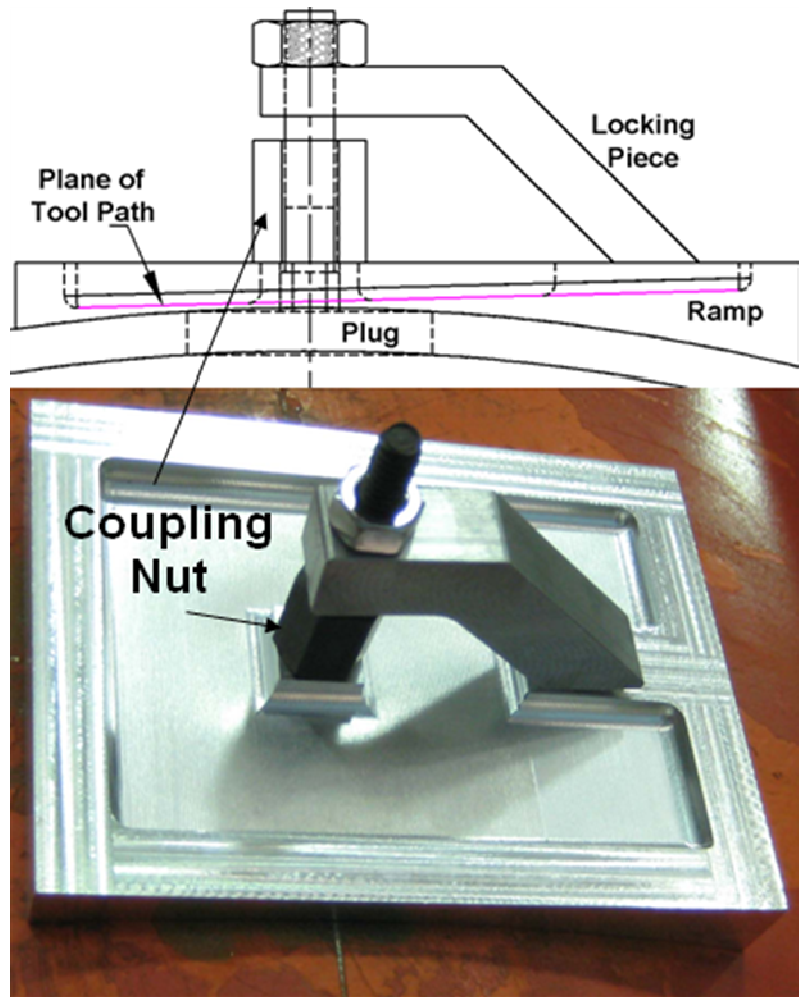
Schematic and actual image of securing the ramp piece.
